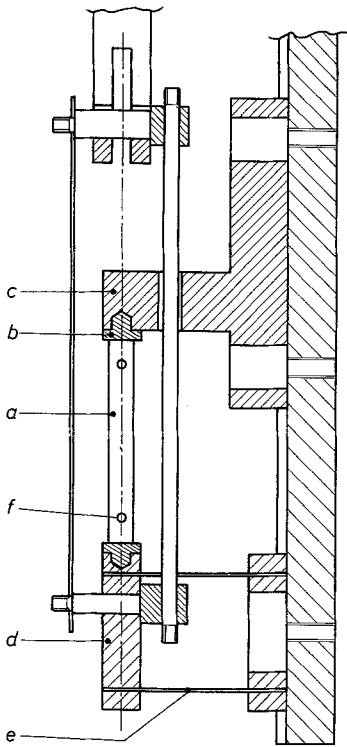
Sectional view of compression adaptor for tensile creep machines: *a* test piece, *b* end plates, *c* and *d* fixed and movable plattens, *e* spring guides and *f* extensometer locations
